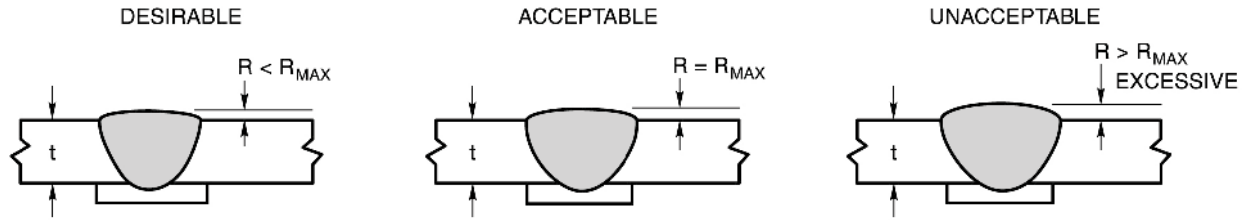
FIGURE A – WELD PROFILES FOR BUTT JOINT REQUIREMENTS (see Tables 2 and 3)
